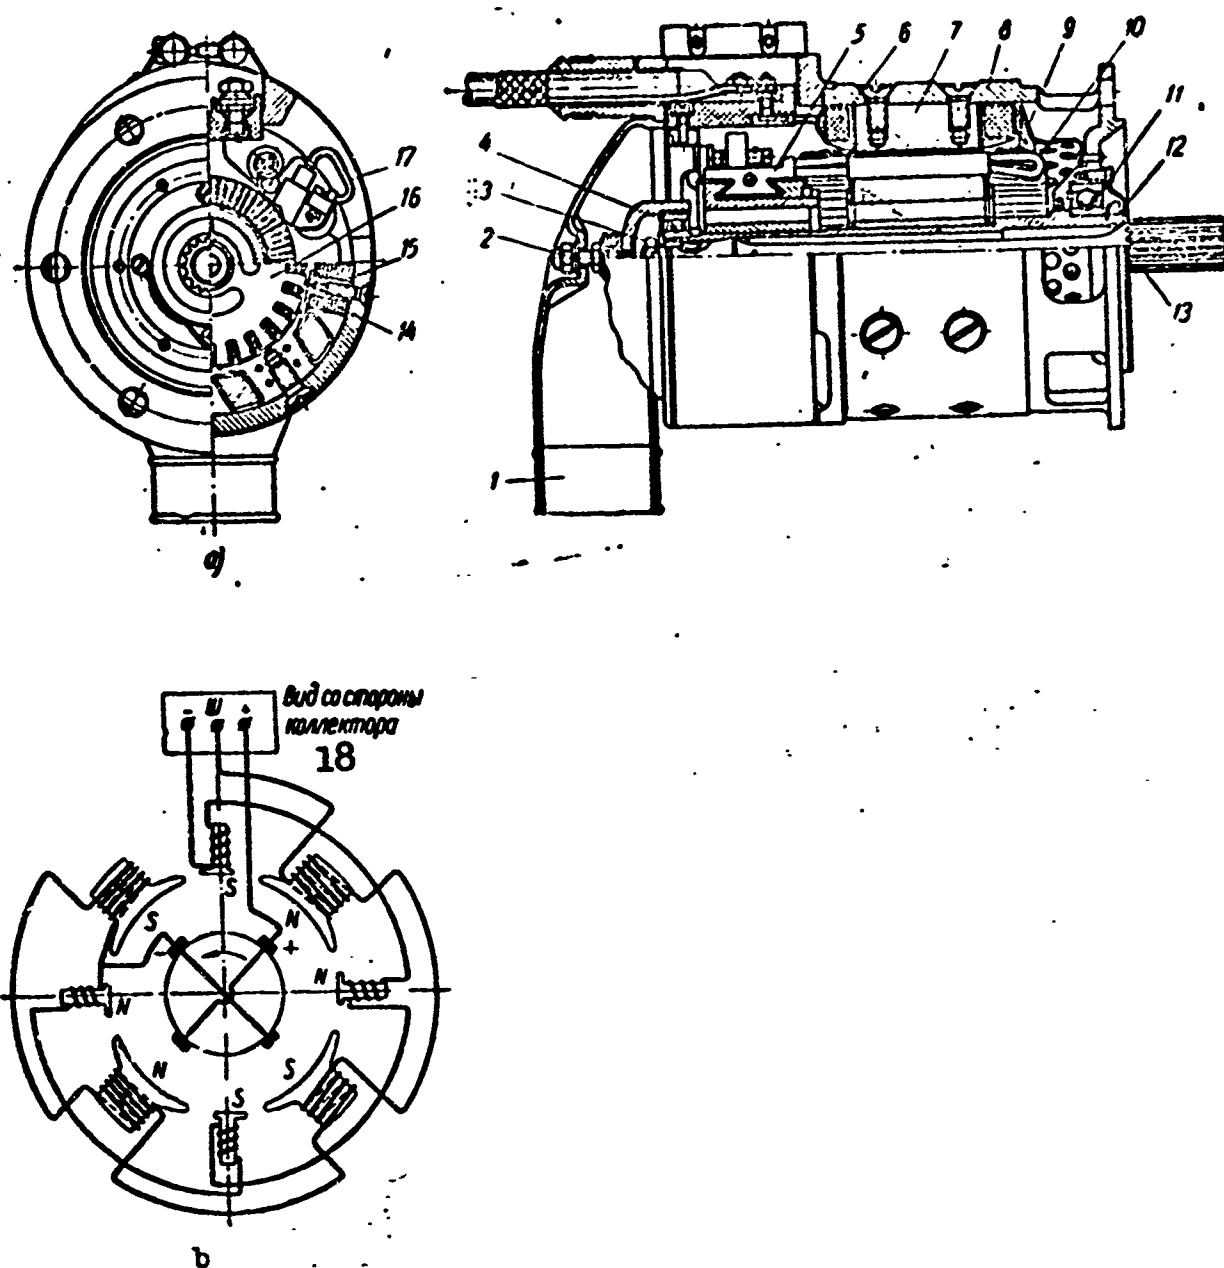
Construction (a) and wiring diagram (b) of GSR-3000 generator with full complement of commutating poles. 1) Cap; 2) cap mounting; 3) flexible-shaft mounting; 4) bearing; 5) commutator; 6) field winding; 7) poles; 8) housing (mono-block); 9) protective guard; 10) armature winding; 11) bearing; 12) hollow shaft; 13) flexible shaft; 14) commutating-pole winding; 15) commutating pole; 16) armature; 17) brush-holder; 18) view from commutator.
